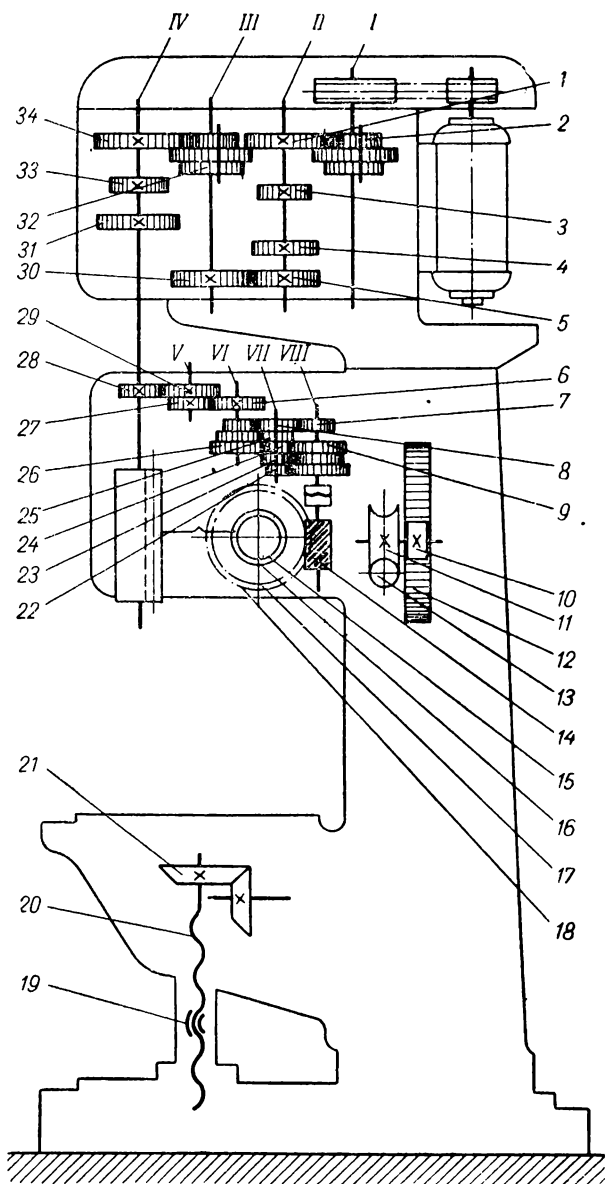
Gearing diagram of the upright drilling machine, model 2A135
